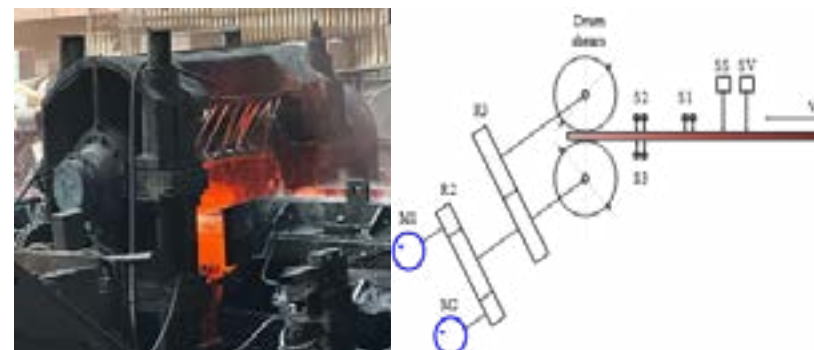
General view of drum shears (a), process flow diagram and electromechanical equipment layout diagram (b) of drum shears of the hot rolling mill «1700»: S1, S2 – existing strip presence sensors; S3 – strip presence sensor (DELTA IRIS); SS – lane presence sensor (DELTA Rota – Sonde); SV – lane speed sensor (DELTA Velas DL 4068); VS – strip speed
